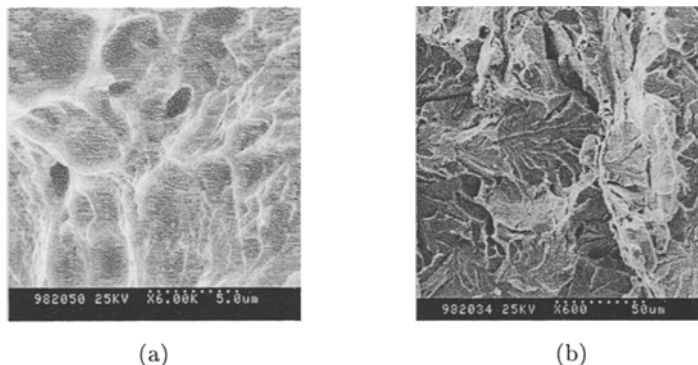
Fractograph indicating (a) ductile fracture mechanism of dynamic crack growth; (b) cleavage fracture mechanism of quasi-static crack growth
